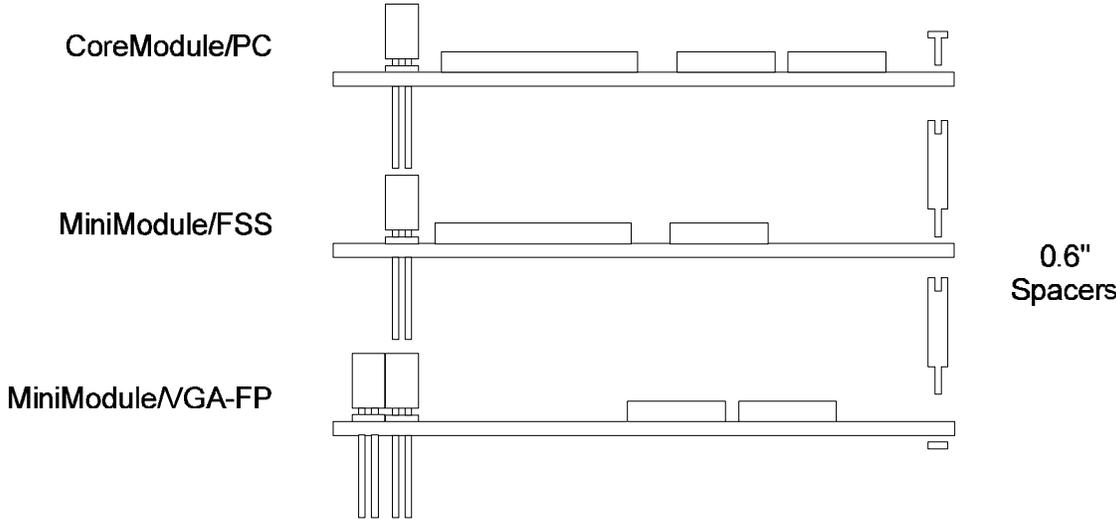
CoreModule/PC and MiniModule Self Stacking Assembly
